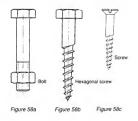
shows a hexagonal bolt which must be made of either galvanized steel or, better still, of brass or stainless steel,
